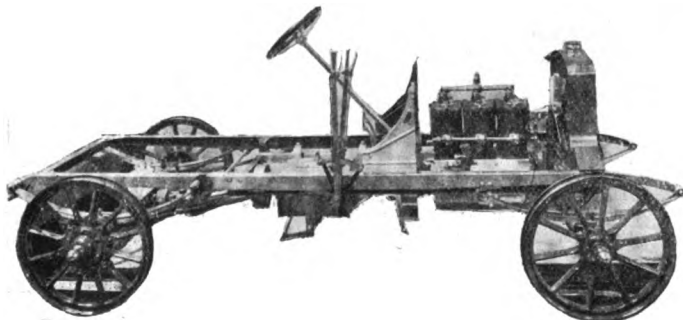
Chassis of National 15-17 h.p. Three-cylinder Car.
